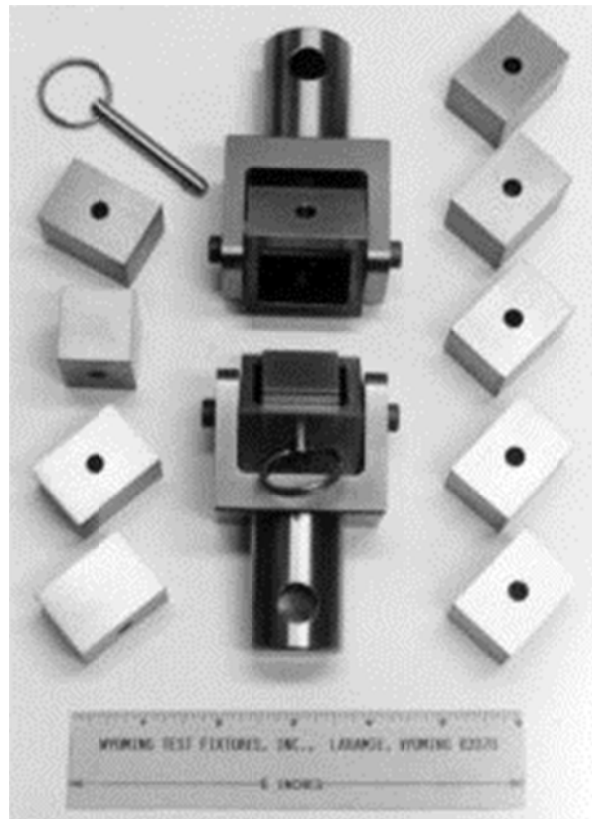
Test Fixture for Sandwich Panel Flatwise Tensile Test [11]
